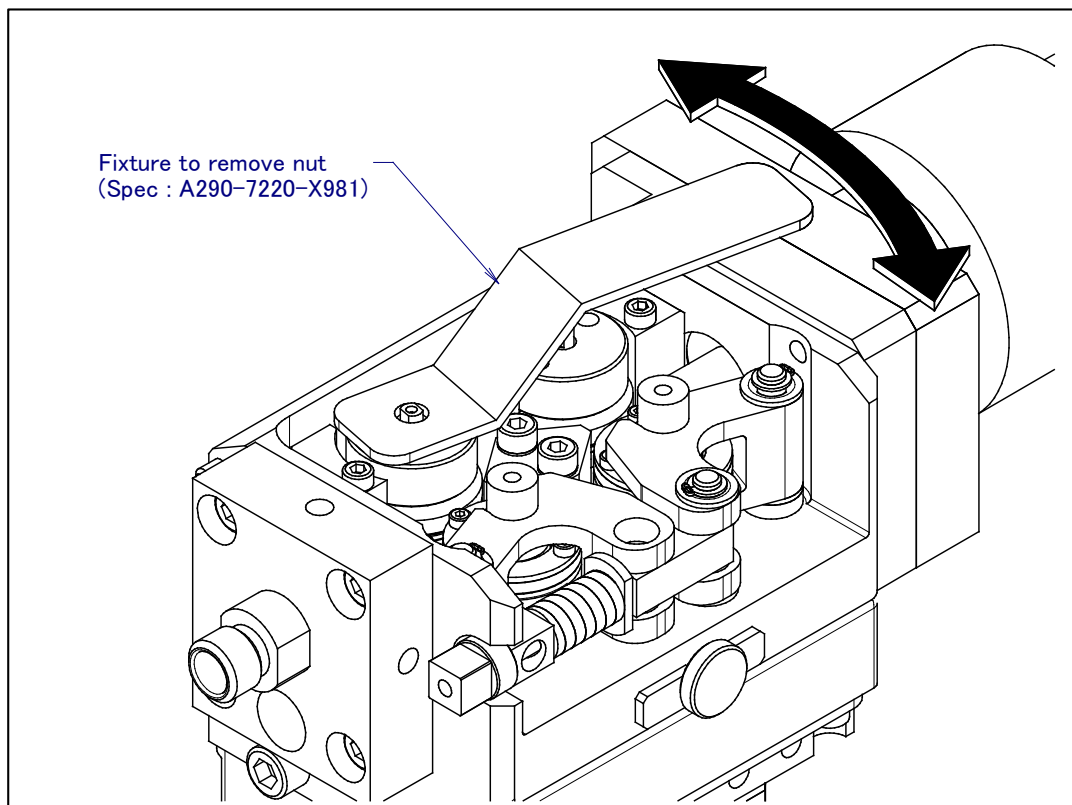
(c) Fixture to remove nut (When CE specification is specified)
